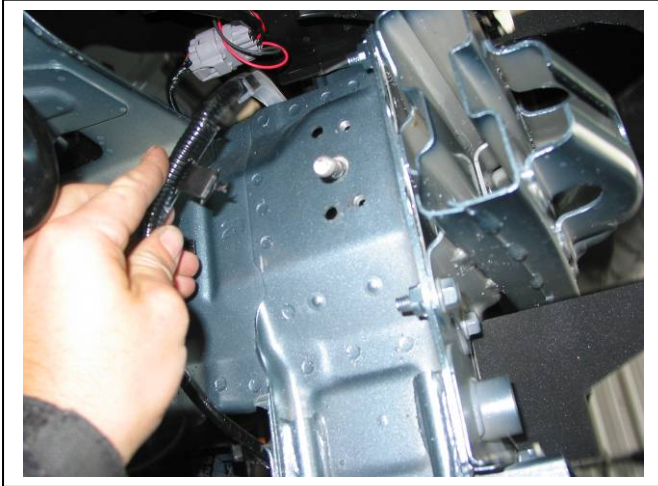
Bolt in top hole in chassis rail. Wiring harness removed.
